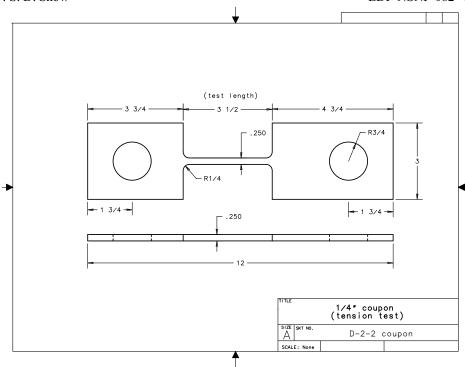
D-2-2 test specimen geometry for 1/4-inch thick plate material.
